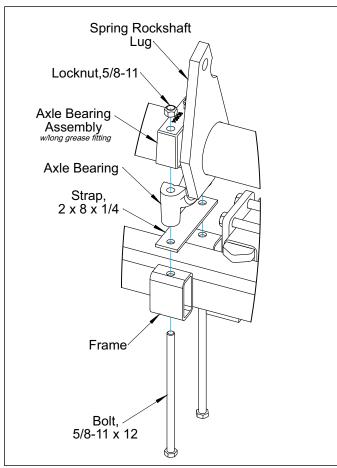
Axle Bearings 11 & 13 Shank Machines Only
